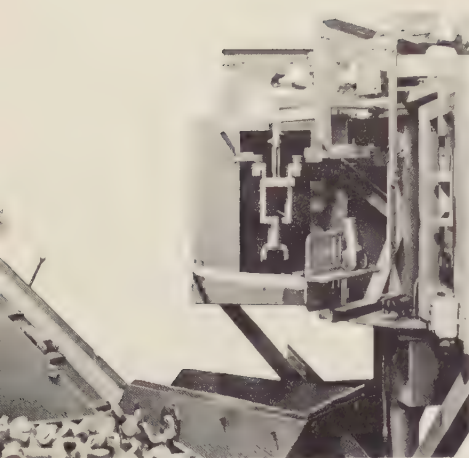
When a casting whose frequency of vibration indicates it is defective reaches the reject station, the clamping device automatically opens and drops the casting onto a conveyor for transfer to a defective casting hopper. At the right of the clamping device is a casting waiting to be sent through the inspection process. The castings shown in the foreground are waiting to be inspected.
